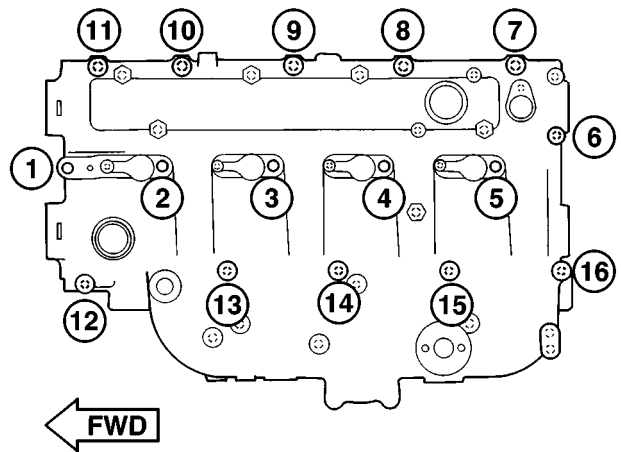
CYLINDER HEAD COVER/INTAKE MANIFOLD TIGHTENING SEQUENCE
